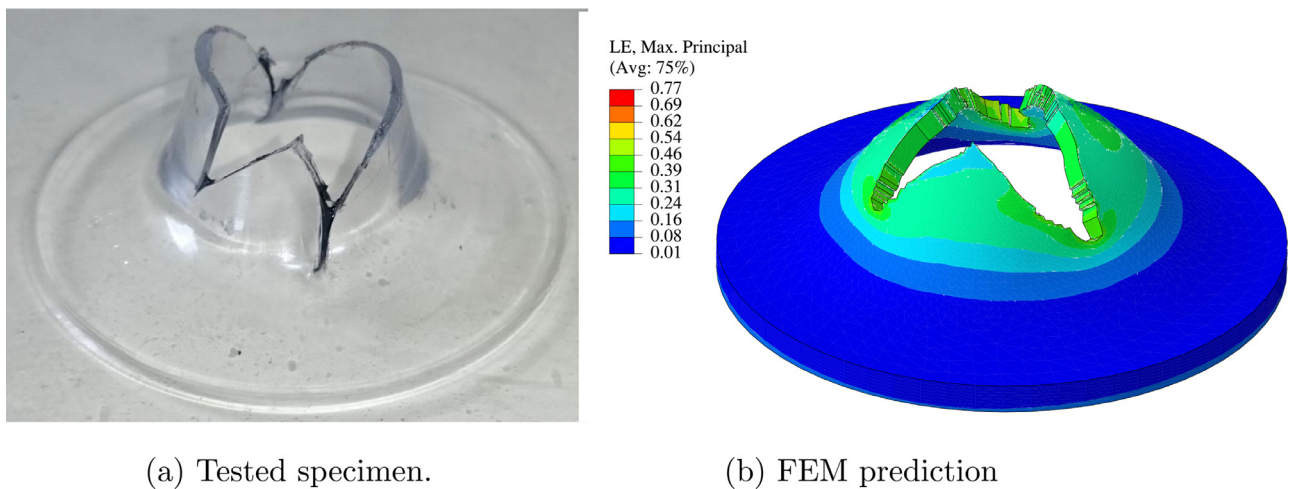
Fracture aspect of the FWT specimens tested using lubrication.
